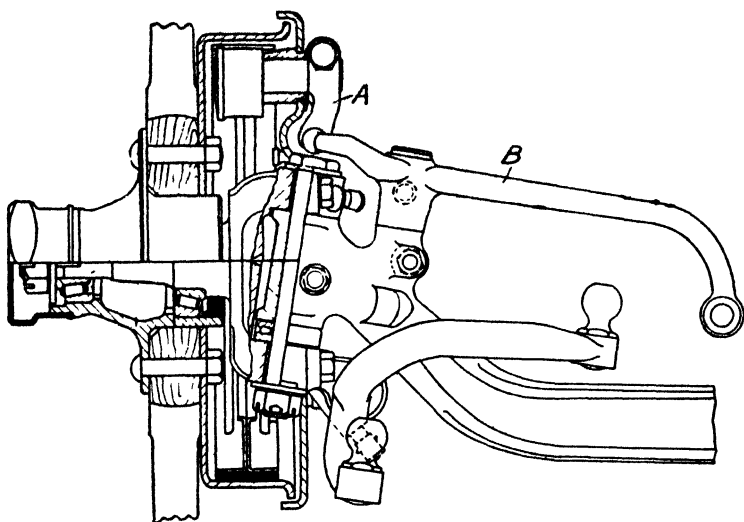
LEVER MECHANISM FOR FRONT-WHEEL BRAKES.
